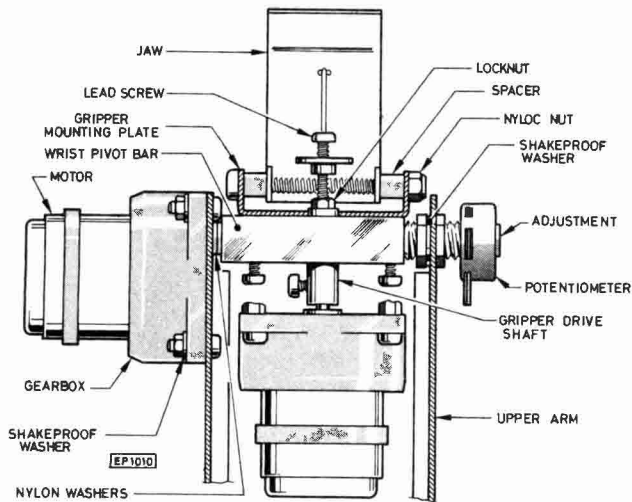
Linkage between motor, gripper mounting bar and potentiometer for axis 3 movement
